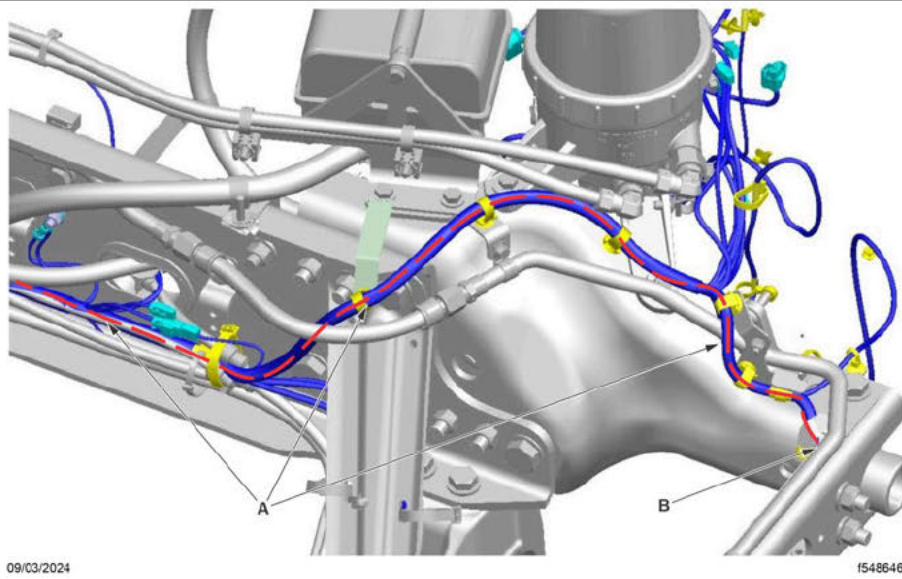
, ACC Extension Harness A66-37418-000 Connection to Chassis Overlay Harness
